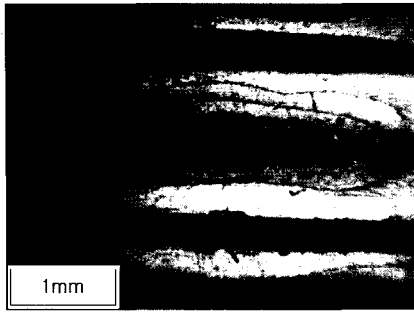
Weld cross section for Experiment 1-3(S)
